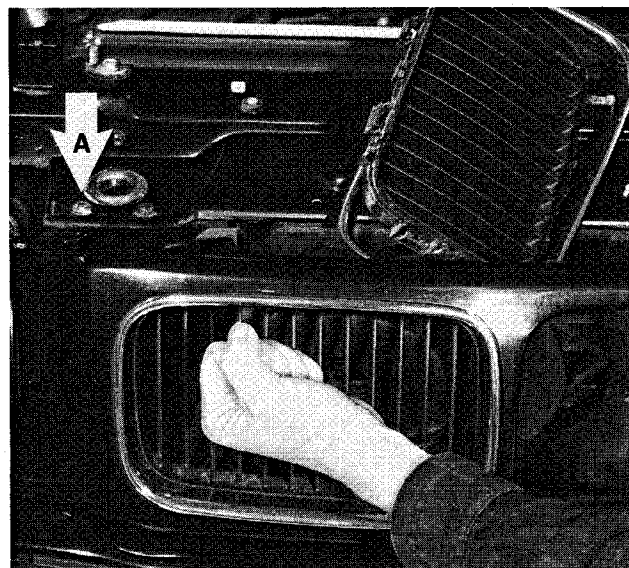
Radiator grille being tapped inward. Right side front panel top retaining screw is shown at A.
